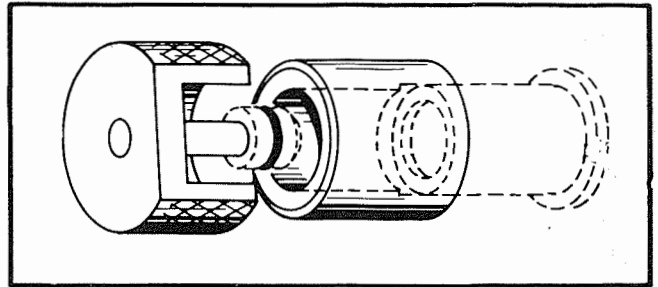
Rocker Arm Shaft Spacer Installing Tool
